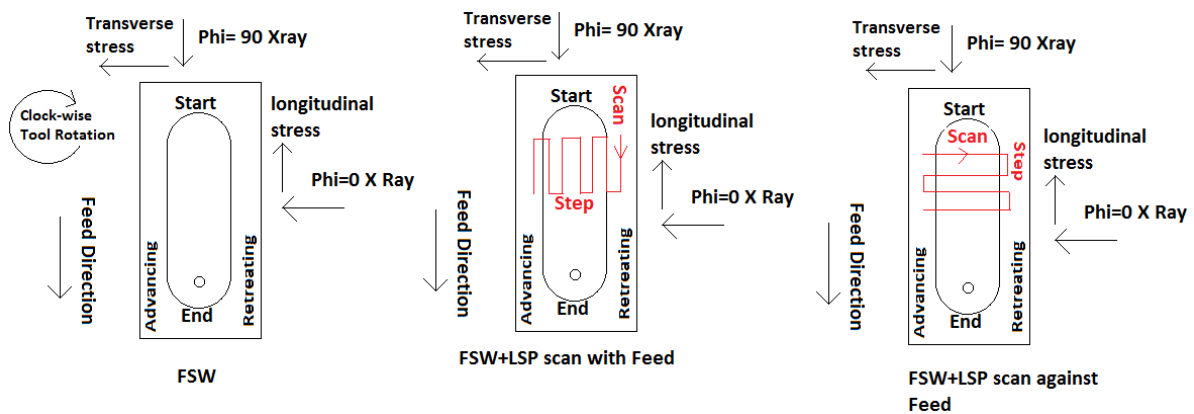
Schematic of X-ray Measurement Directions Relative to the Friction Stir Welding and Laser Shock Peening Directions
